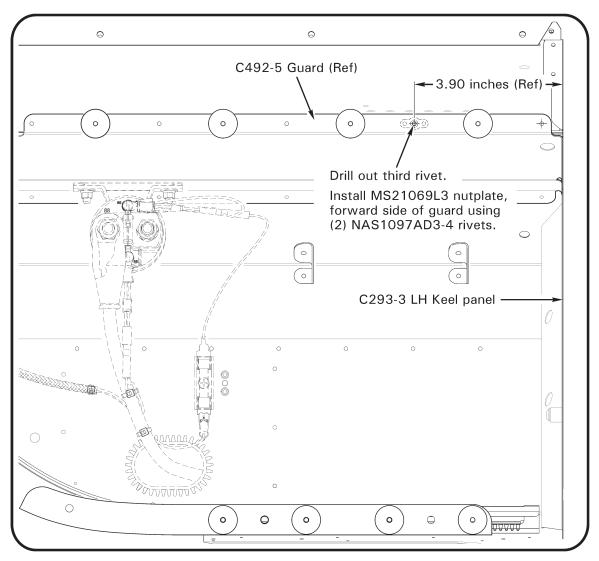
Nutplate installation using existing rivet hole (view looking forward)
